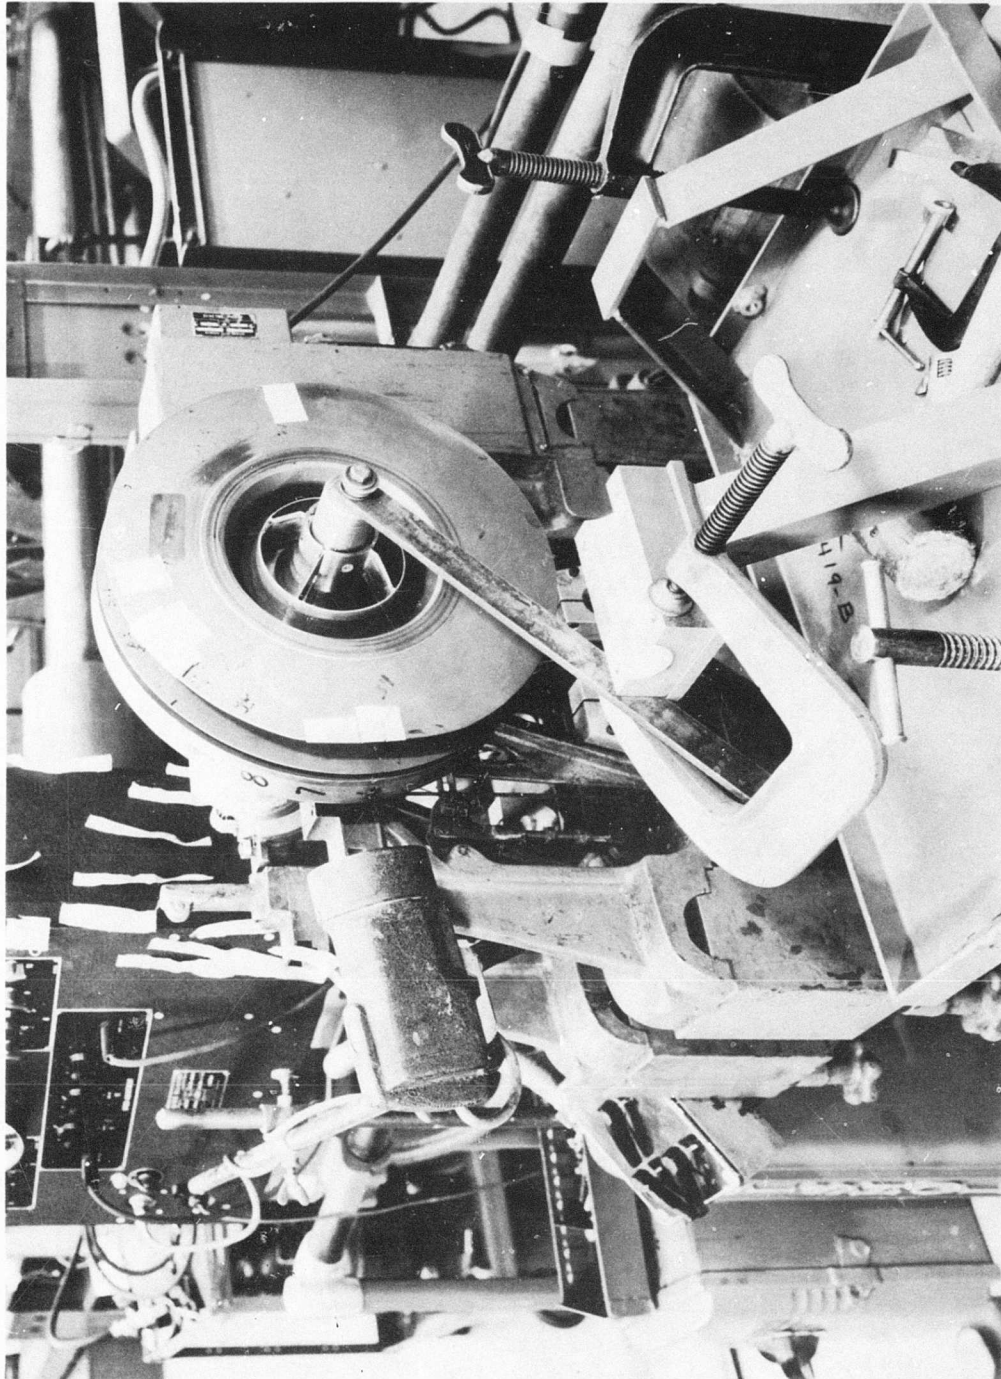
Assembly of Compressor Rotor and Circular Inlet Vane Mounted in Balancing Machine.
